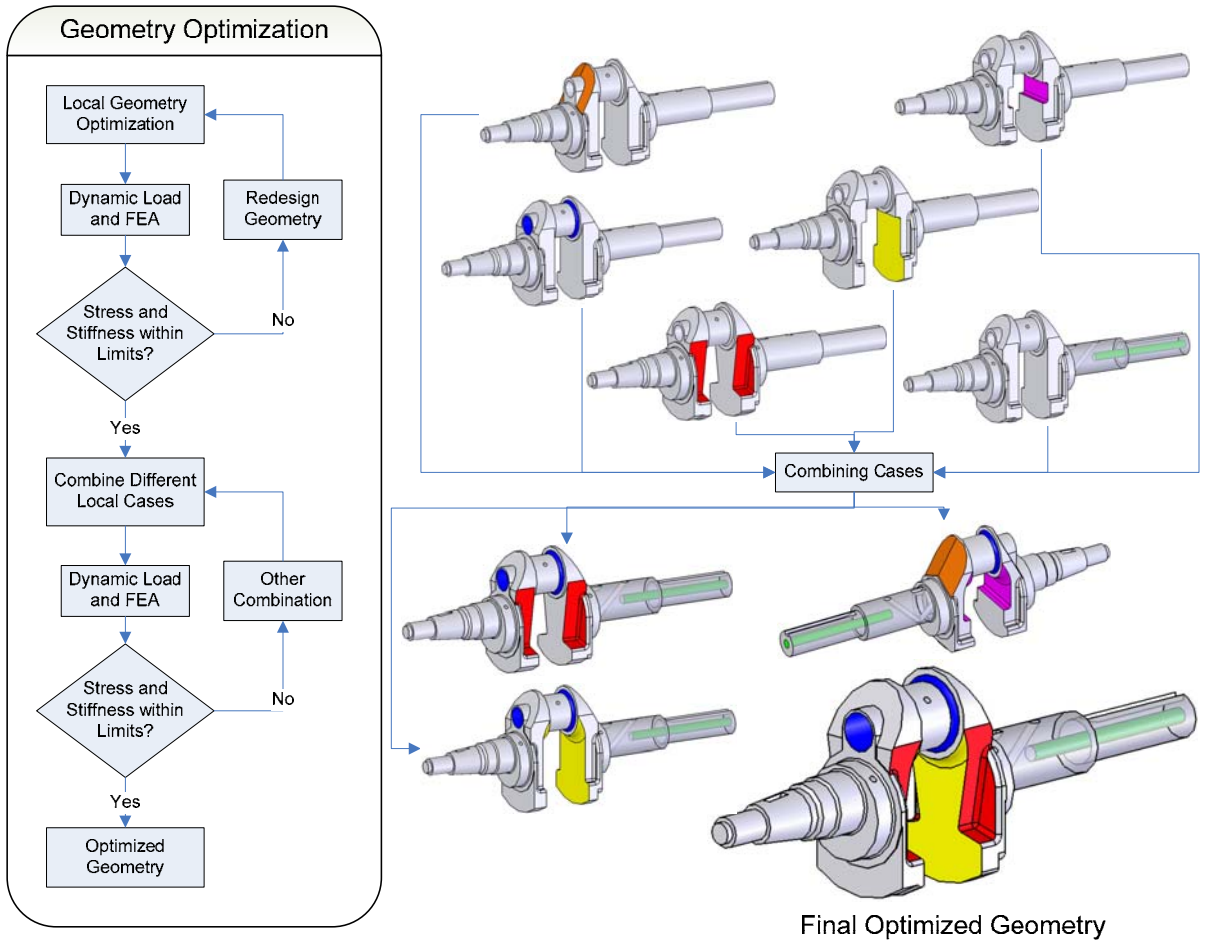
Geometry optimization flowchart and optimized geometry of the forged steel crankshaft from Stage I.
